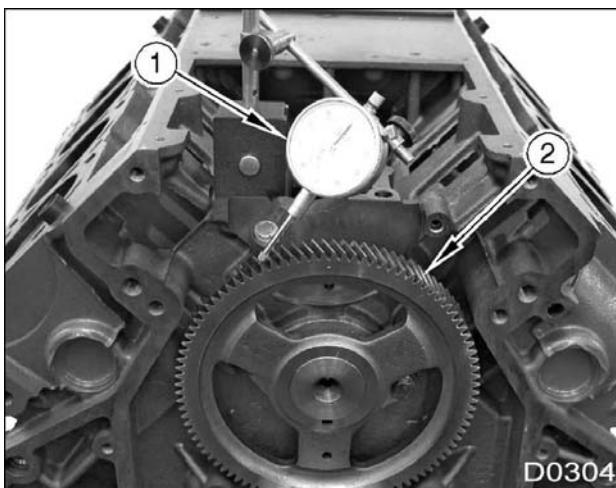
Gear backlash check (camshaft gear to crankshaft gear)
